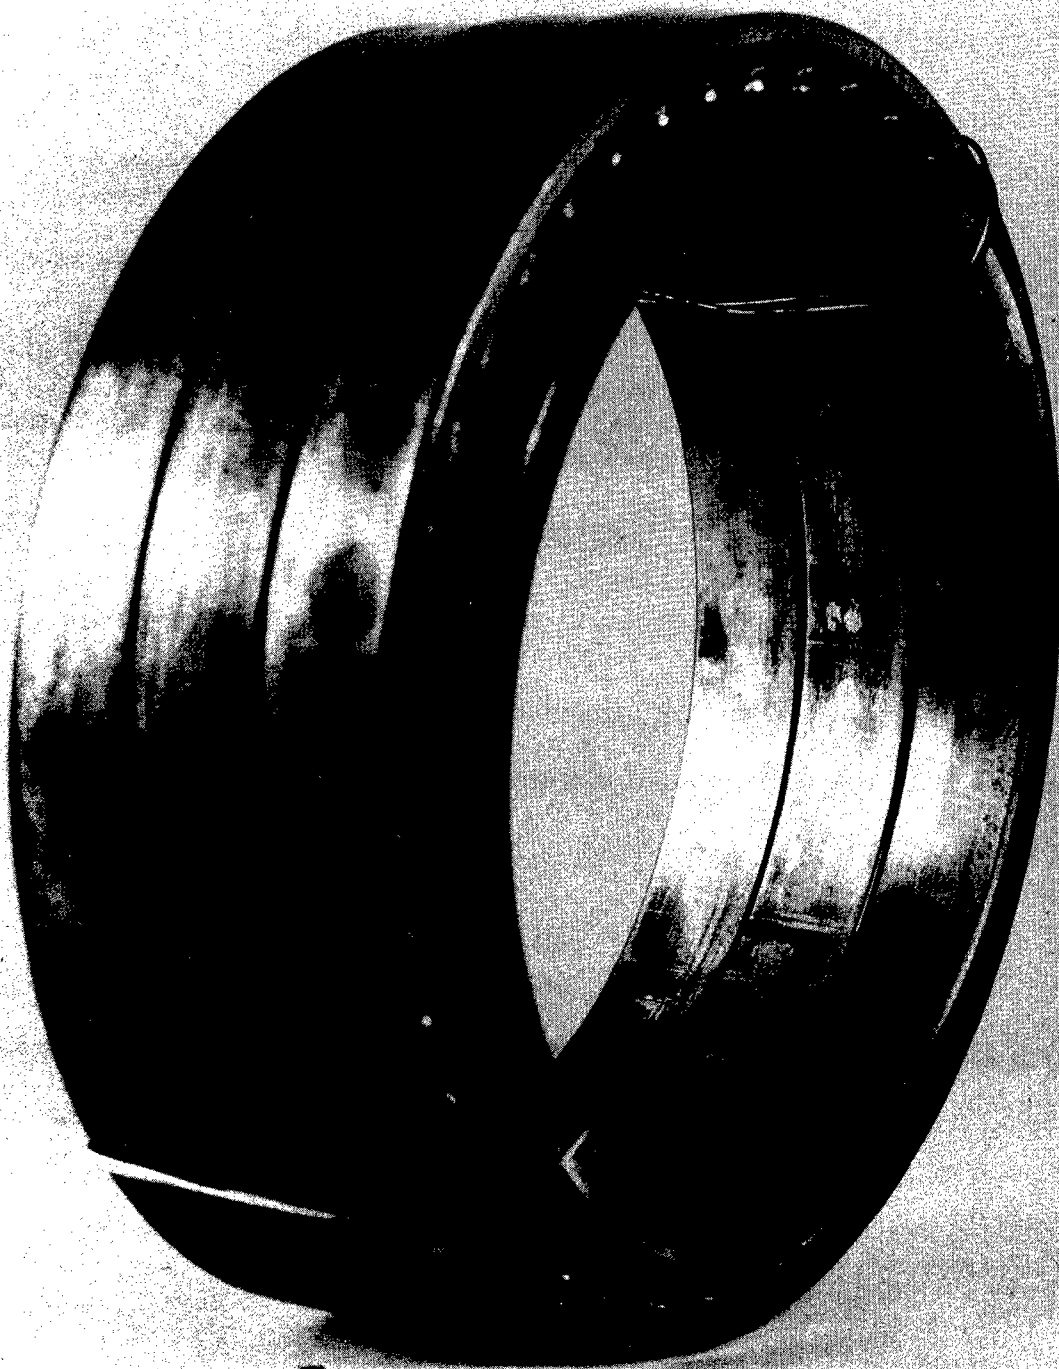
Side View Galled Blade Bearings. Aeroproducts A422-69
